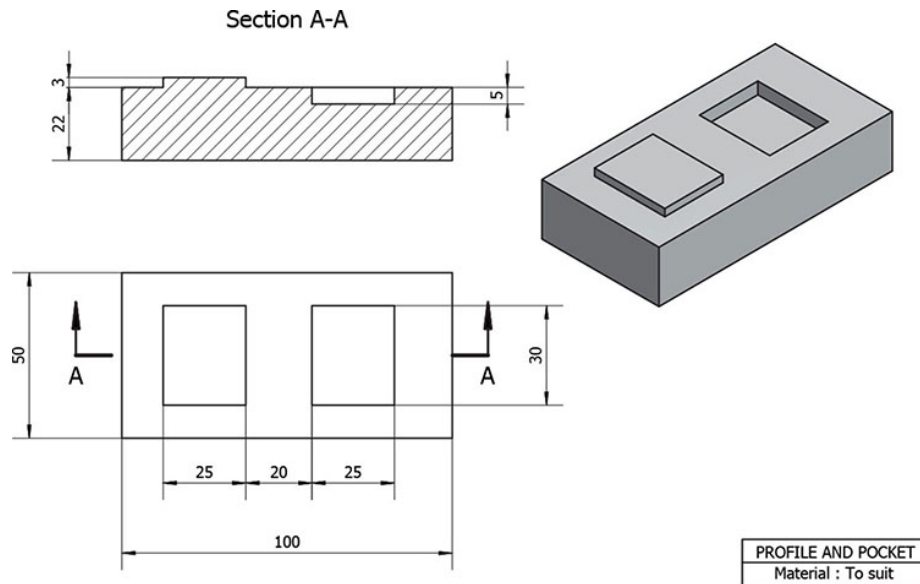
Workpiece with a protruding profile and a recessed pocket.
